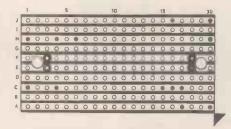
Mains power supply (p.s.u.) stripboard component layout, less transformer.
